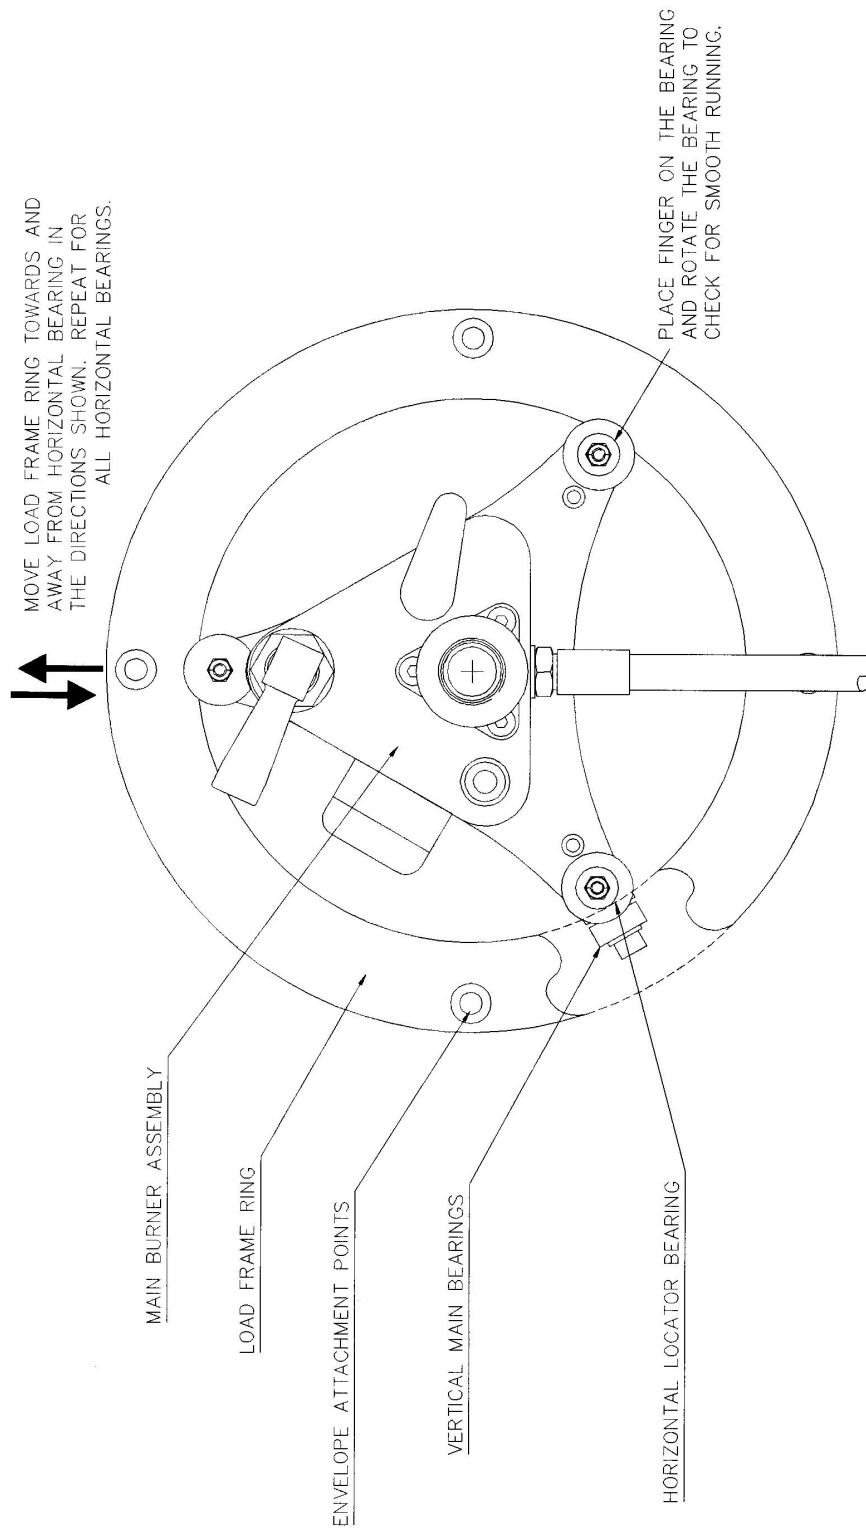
CLOUDHOPPER BEARING INSPECTION.
